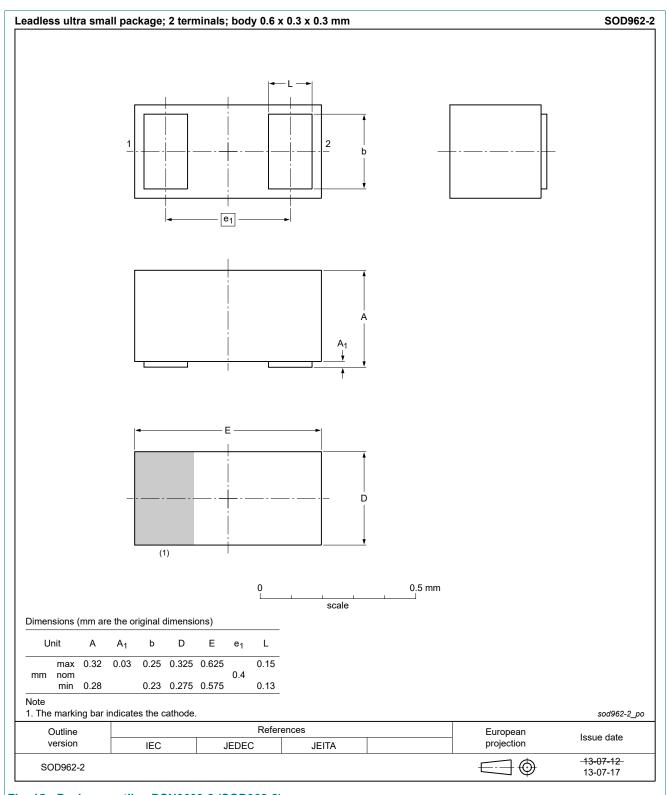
Package outline DSN0603-2 (SOD962-2)
